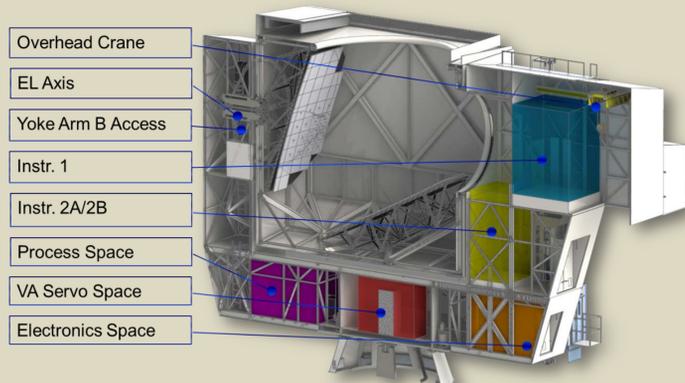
Cross section through the CCAT-prime telescope highlighting science equipment spaces and access.
